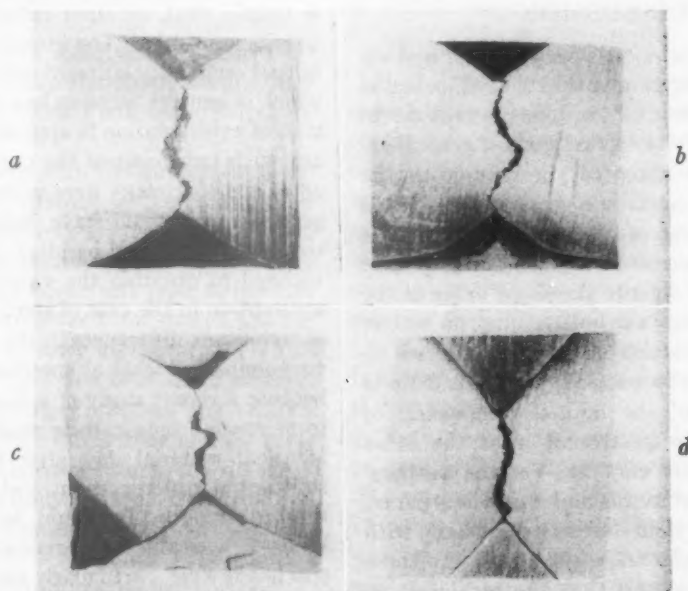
LONGITUDINAL SECTIONS OF FRACTURED COPPER SPECIMENS.
